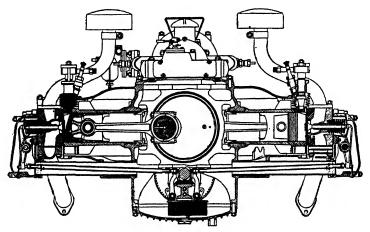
THE KRUPP FOUR-CYLINDER OPPOSED ENGINE
